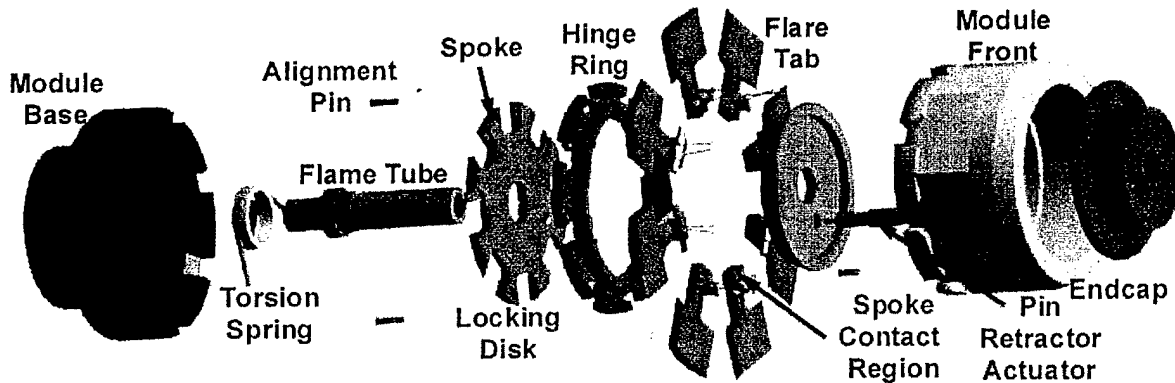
The Exploded Assembly View of the Prototype Range Correction Module for a Mortar.
